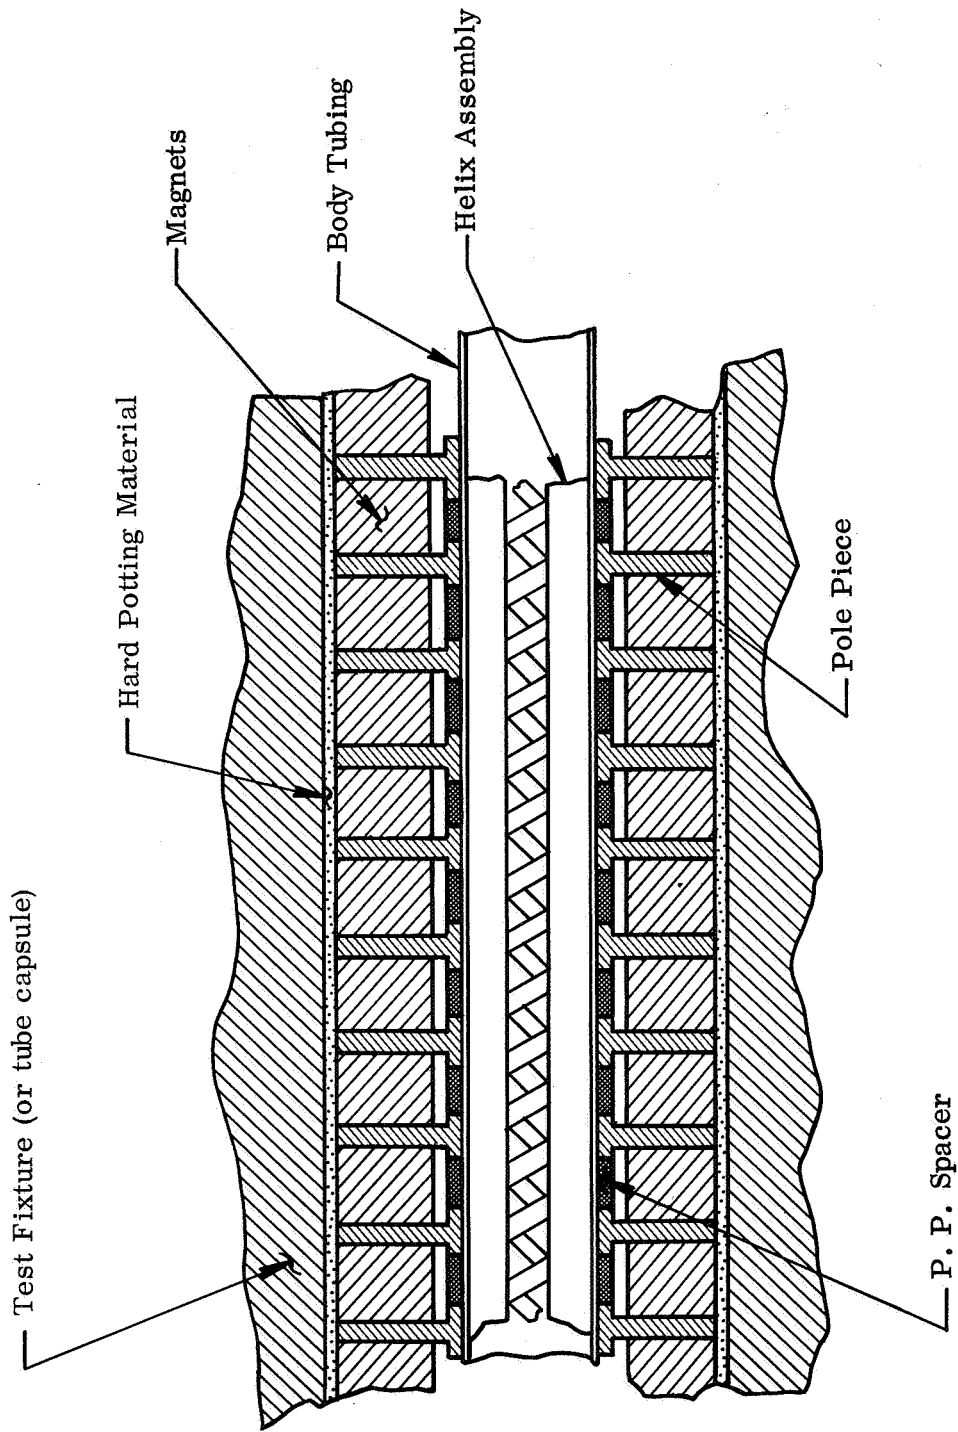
Basic configuration of body assembly segments. Helix assembly lock-in uses alloy technique.
